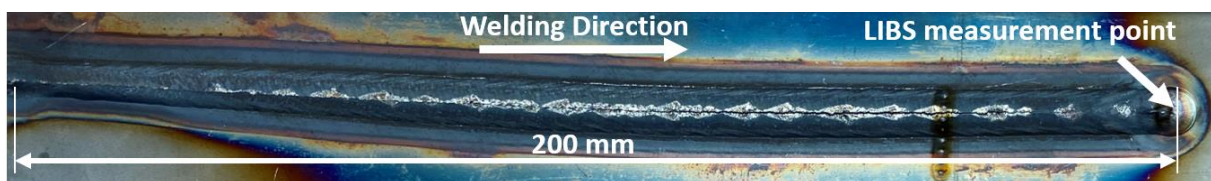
Finished weld seam of the Sample 1, LIBS measurement spot on the weld end crater is marked.
